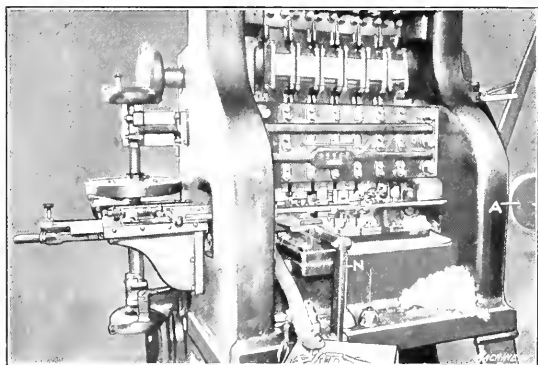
The Cartridge Clip Machine—A Special Machine that completes the Body of the Clip in Six Distinct Operations
